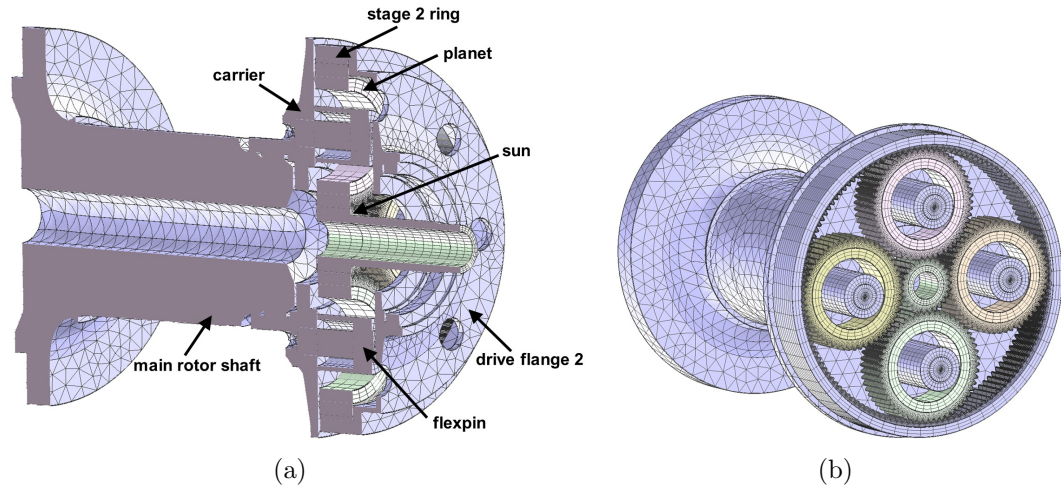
(a) Cutaway view of the finite element model of stage 2 on the W2000, and (b) view of stage 2 from the rear of the gearbox with the housing not pictured.
